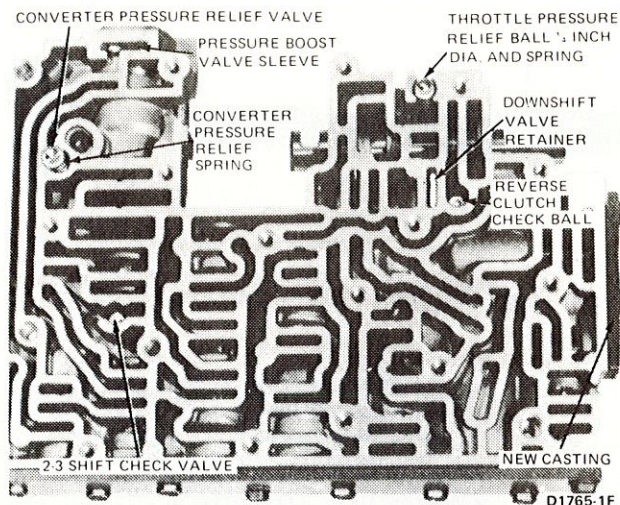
Converter Pressure Relief Valve, Throttle Pressure Relief Valve, and 2-3 Shift Check Valve Locations
